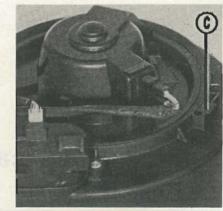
Heater blower motor housing securing clip (C) – assembly shown inverted (Sec 41)
